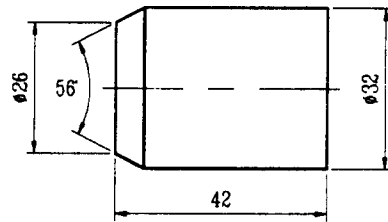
Initial shape of the optimized specimen for rotary forging of bevel gear
